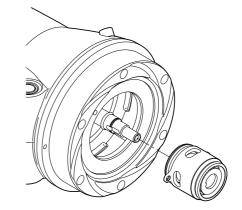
Shaft seal assembly, 0.9 - 1.5 kW
